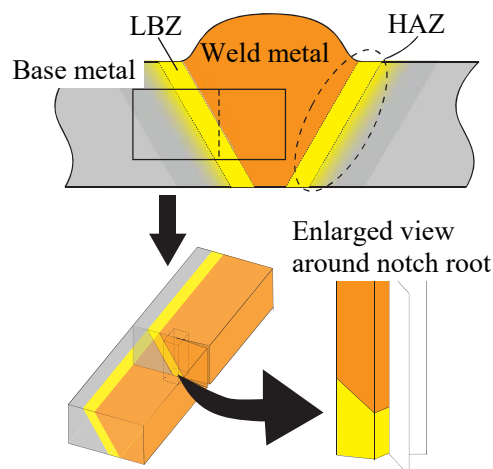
Fracture toughness estimation on welded zone.
